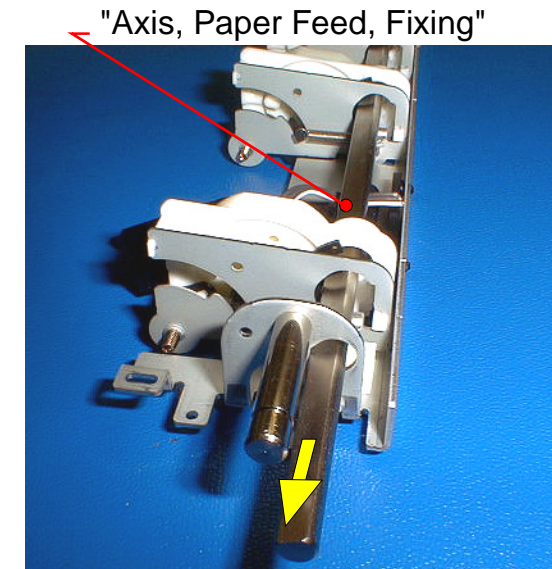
"Axis, Paper Feed, Fixing" Removal
